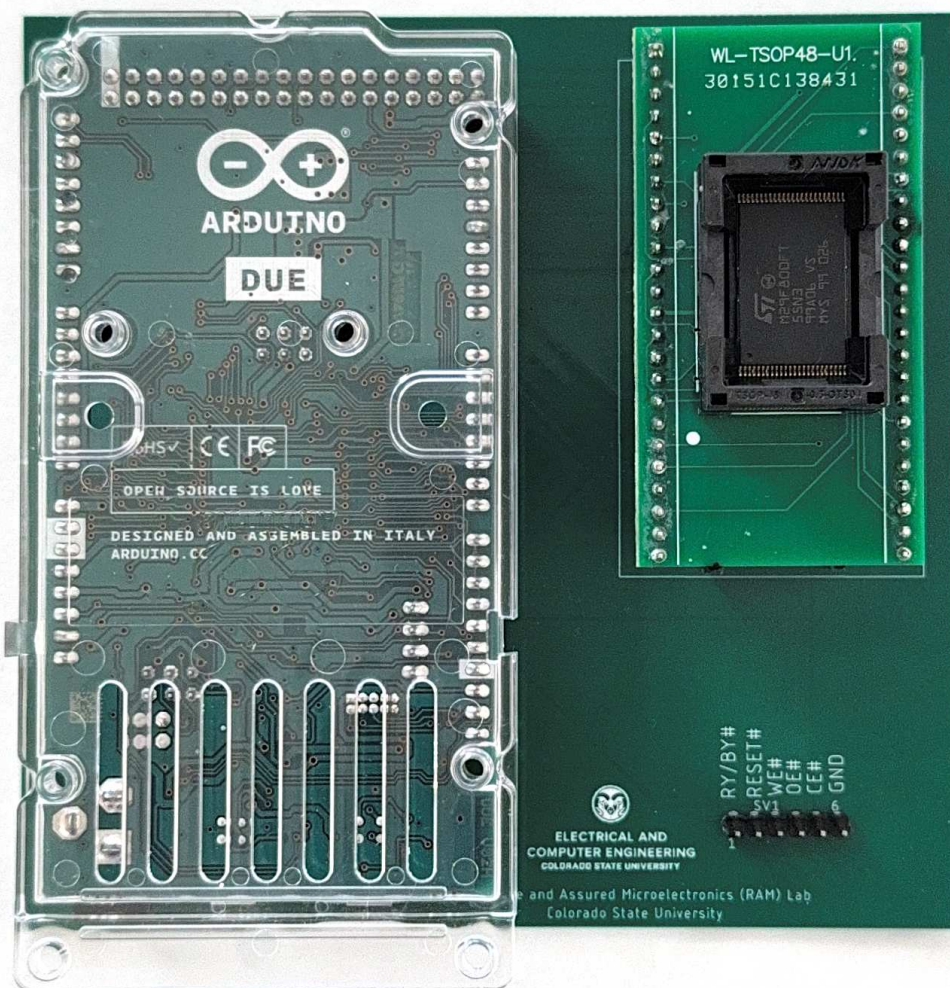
The actual Printed Circuit board (PCB) designed and assembled for NOR flash interfacing
